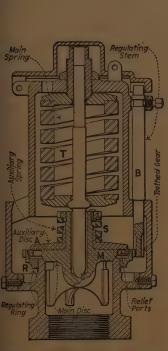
Crane spring-loaded safety valve with auxiliary spring.
